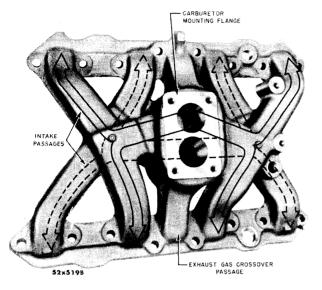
Intake Manifold (Single Rocker Shaft Engine)
